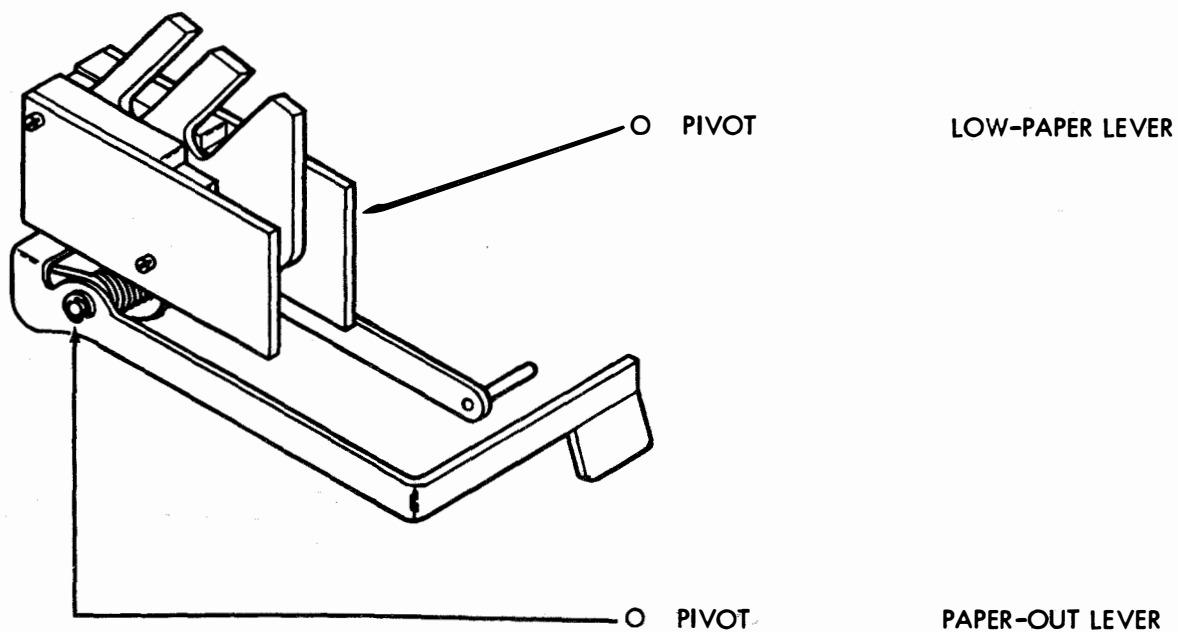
Low-Paper and Paper-Out Switch Mechanism
